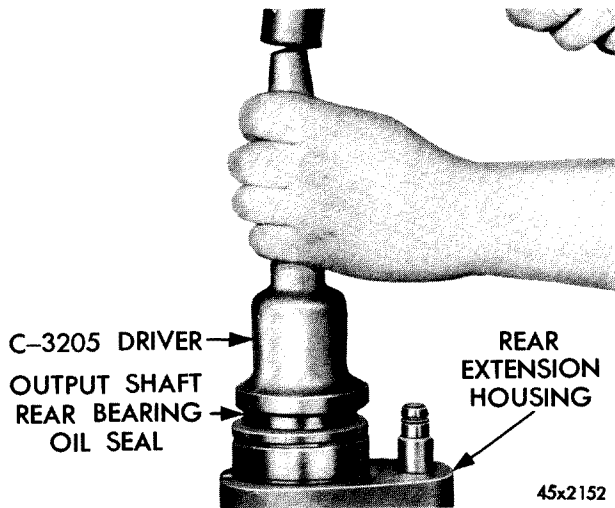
Installing Output Shaft Rear Bearing Oil Seal
